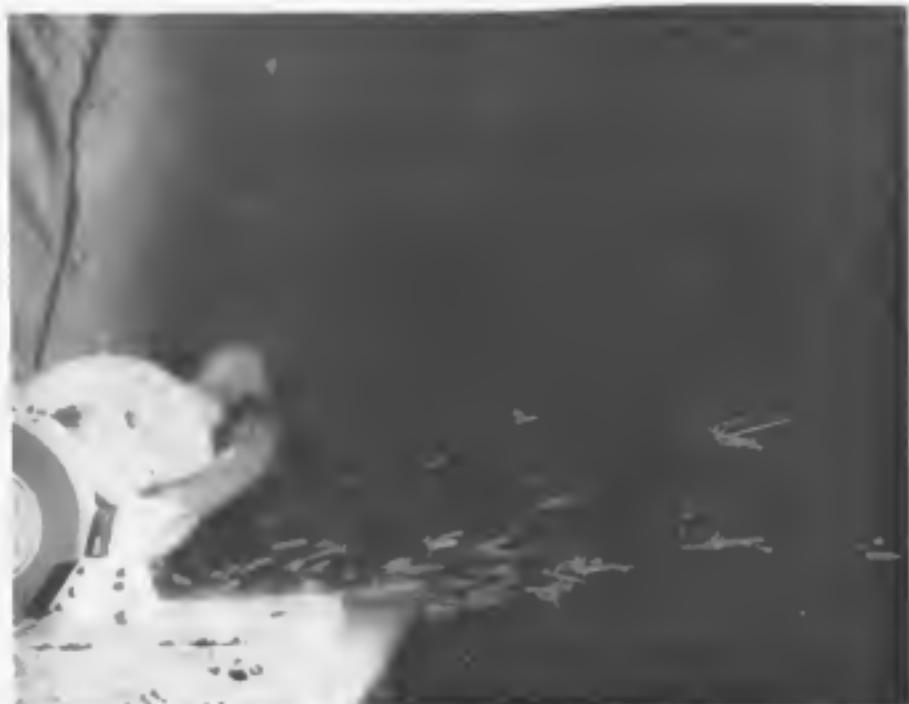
Grinding grey iron with extractor head fitted and operating (Cp. Plate 23).
